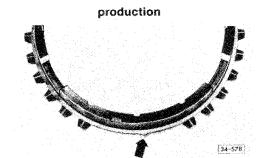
Pinion bearing in gear carrier housing cover, installing
